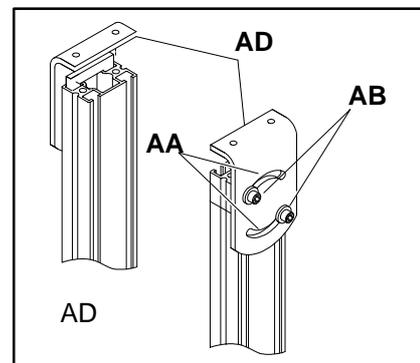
Stand Mounting Brackets for Wider than 610 mm Conveyors
